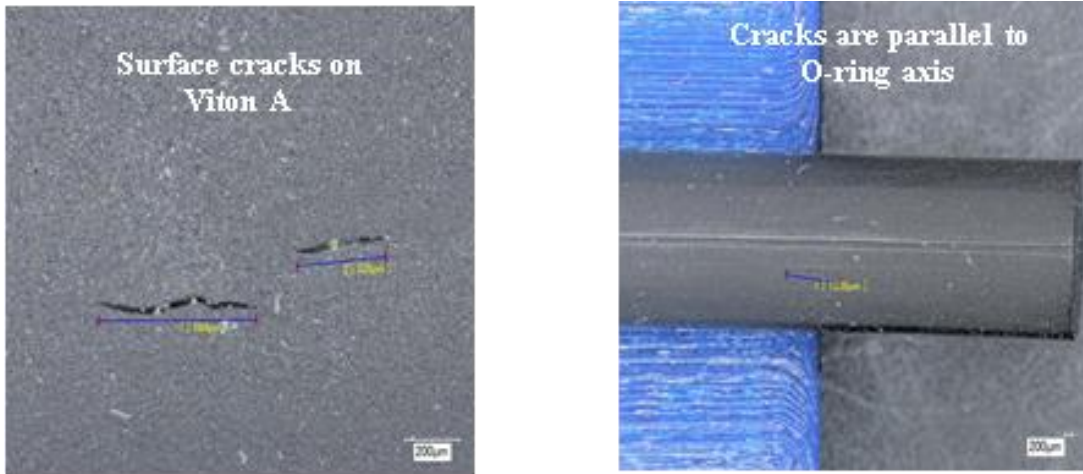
Optical micrographs showing (a) cracks on the surface of Viton A o-rings after Ar/H₂ exposure and (b) orientation of cracks parallel to o-ring axis
